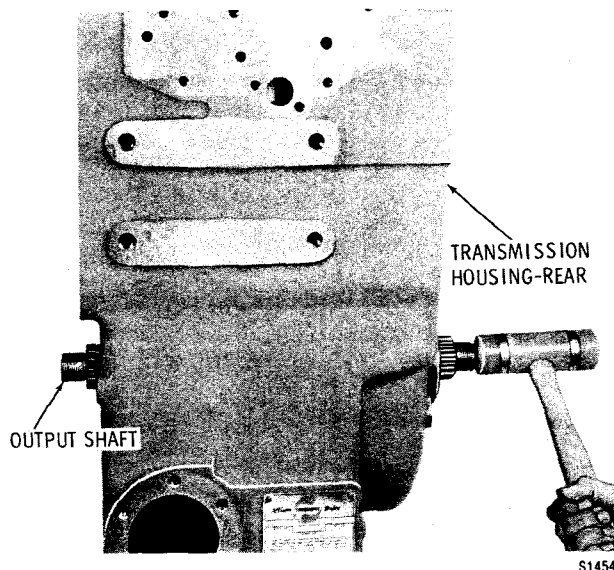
Loosening output shaft front bearing (-1 models with one-piece output shaft)
